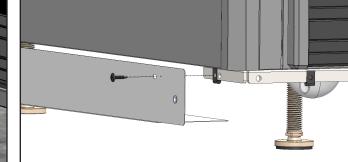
Side and front kickplate brackets. Extra clip on nuts (circled) provided. Fig. 2. Align the side kickplate support with the kickplate brackets.
